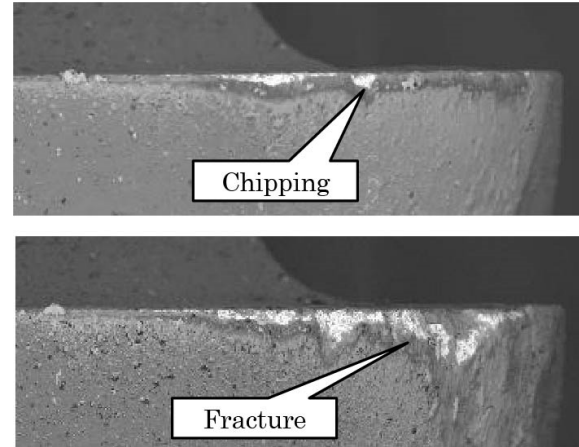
Enlarged view of SEM image of tool wear on flank face by up cutting with (e)pf0.5 (Upside: Cutting length 40m, Downside: Cutting length 60m)
